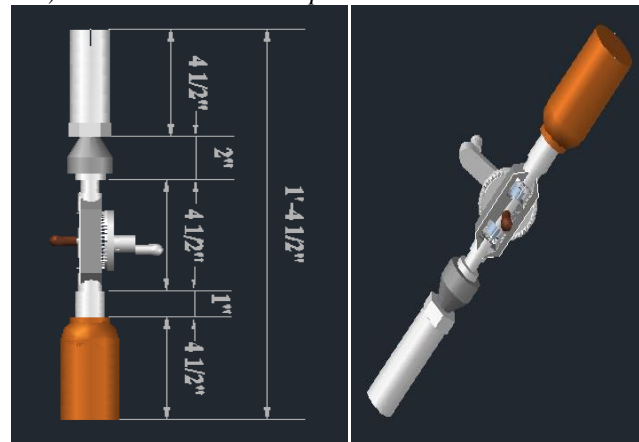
(a) Side view and (b) Perspective view of Manual tender coco opener AUTOCAD Drawing
